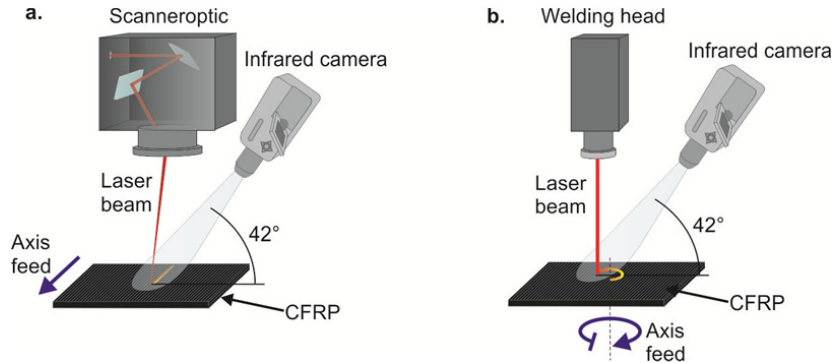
(a) Example set-up for generating quasi-static temperature fields; (b) Example set-up for generation curved bead on plate weld seams with a welding head.
